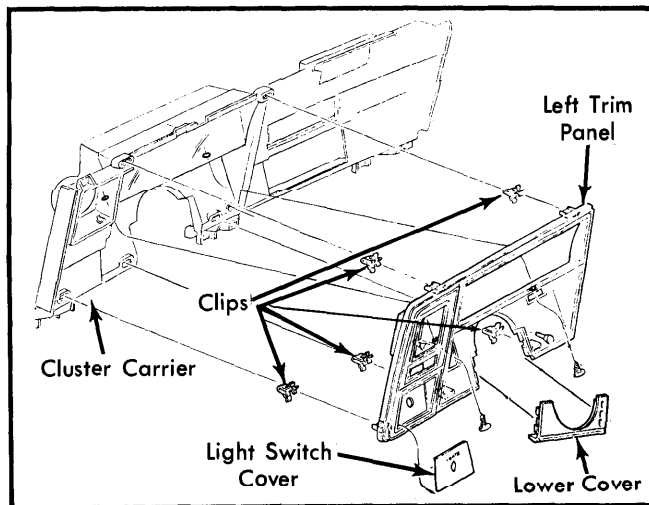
Left Trim Panel Removal (88 and 98 Models)
